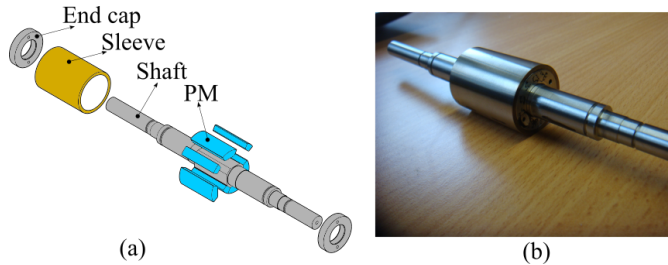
(a) Rotor assembly process; b) assembled rotor.
